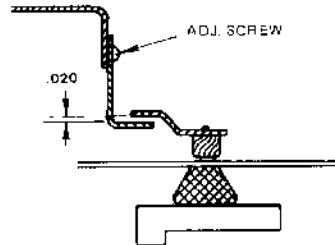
HEAD LOAD BAIL TO HEAD LOAD ARM ADJUSTMENT (OLD STYLE)
